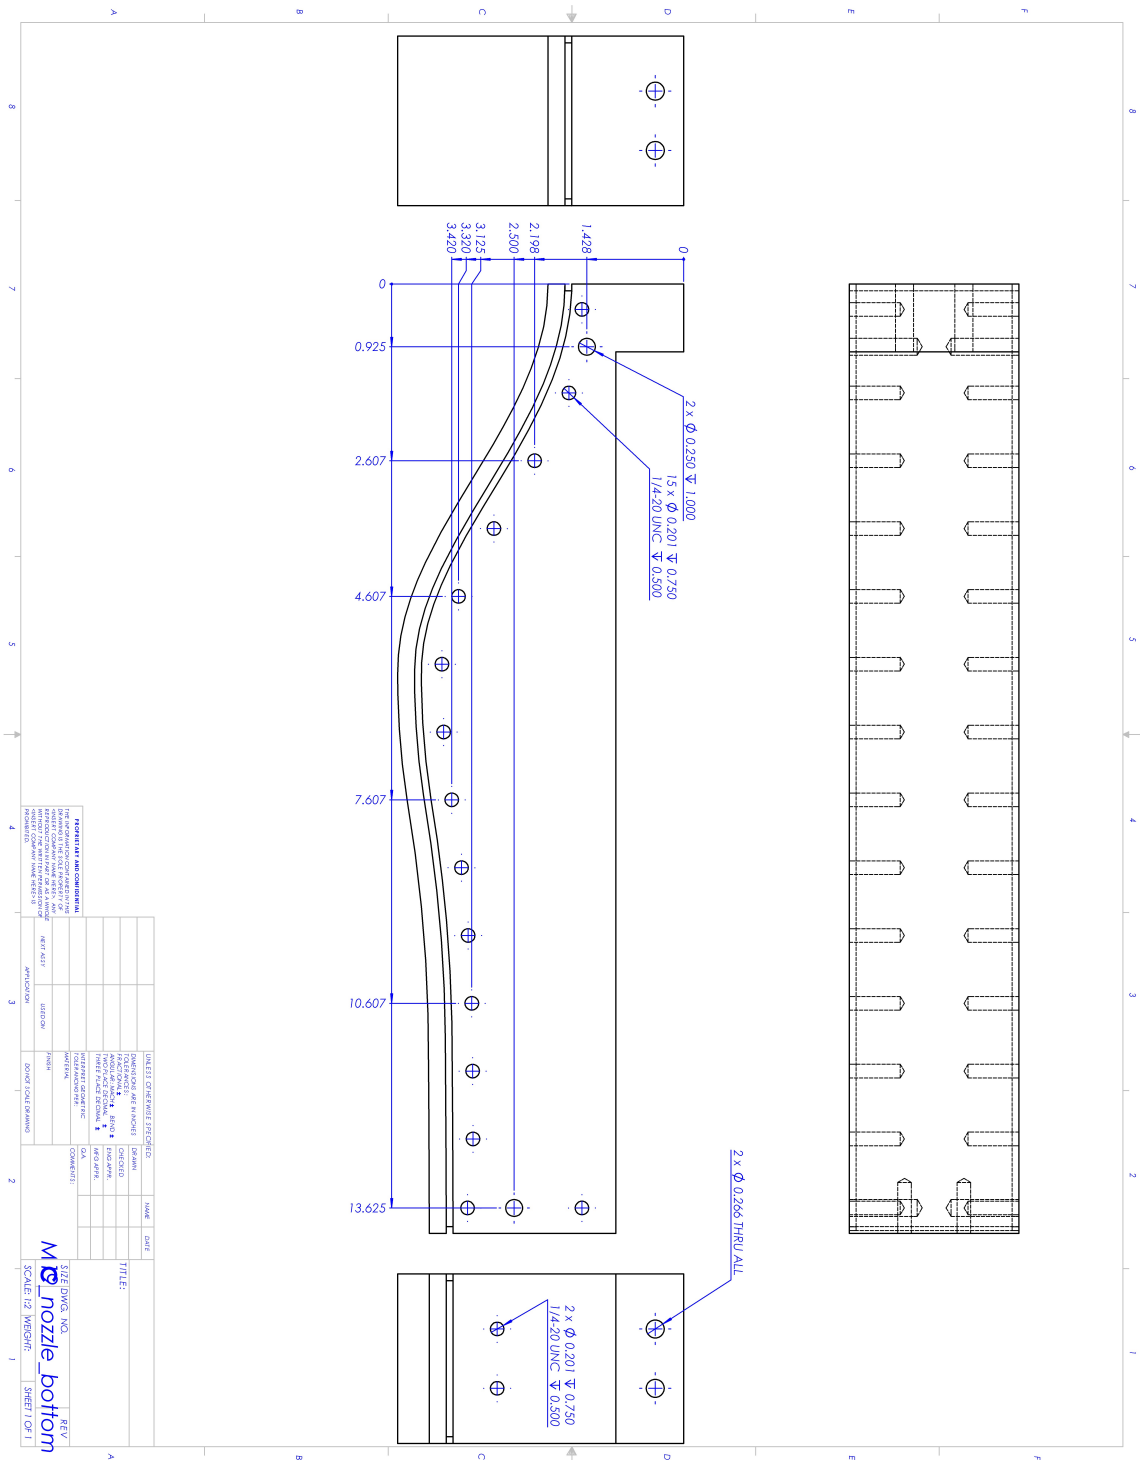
Drawing of Mach 1.9 Nozzle Contour
